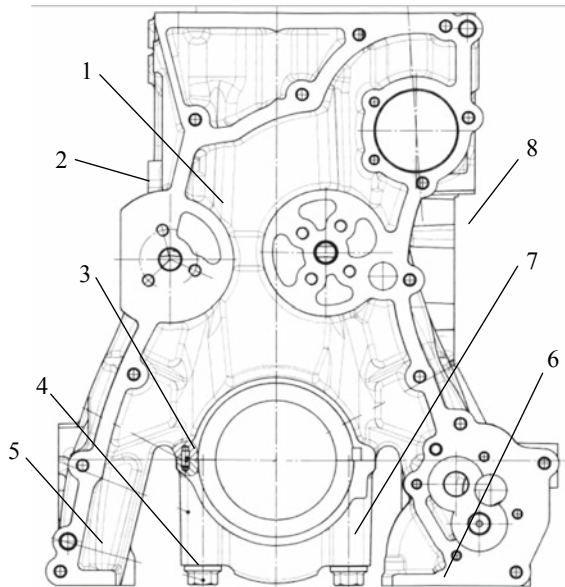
36D Cylinder block structure. 1—cylinder block; 2—side of oil pump; 3—positioning pin of bearing cap; 4—strong bolt; 5—crankcase skirt hem; 6—cylinder body underside; 7—main bearing cover; 8—camshaft side
